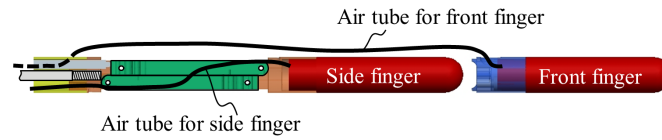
Schematic of the assemblable hand during insertion. The front finger is disconnected from the base, while the side finger is collapsed. Both fingers and base are inserted in-line, reducing the cross section to fit through a 12.5 mm diameter Trocar port.
